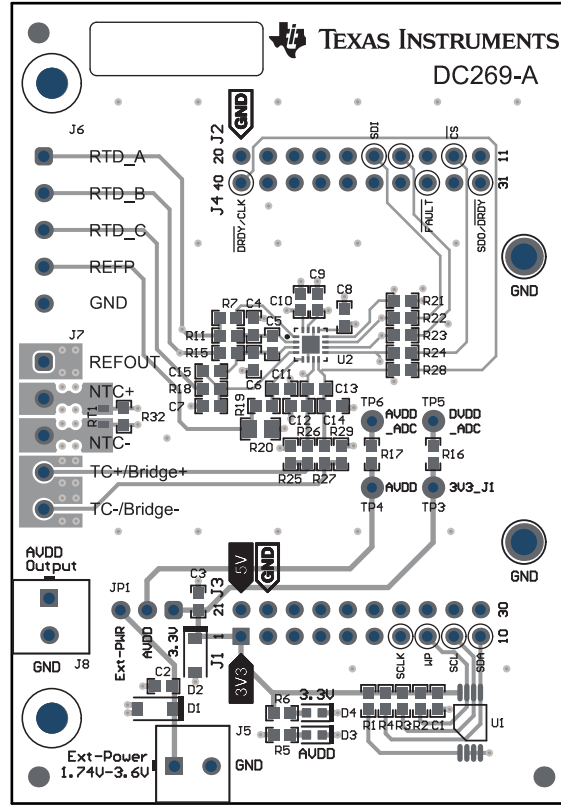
PCB Layout for the ADS122x14EVM (Top View)
